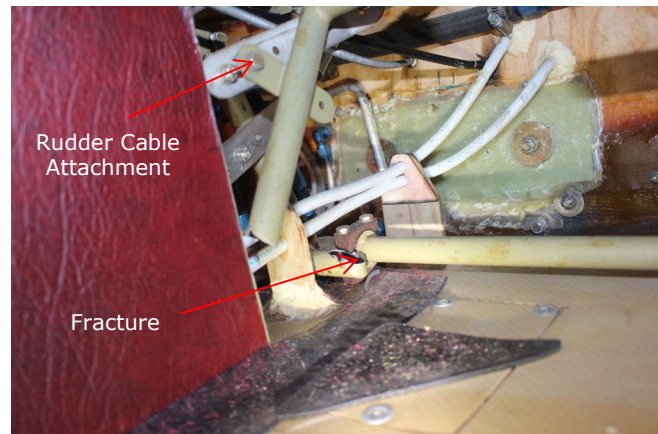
This picture shows the point of failure; note the position of the rudder control cable attachment.
